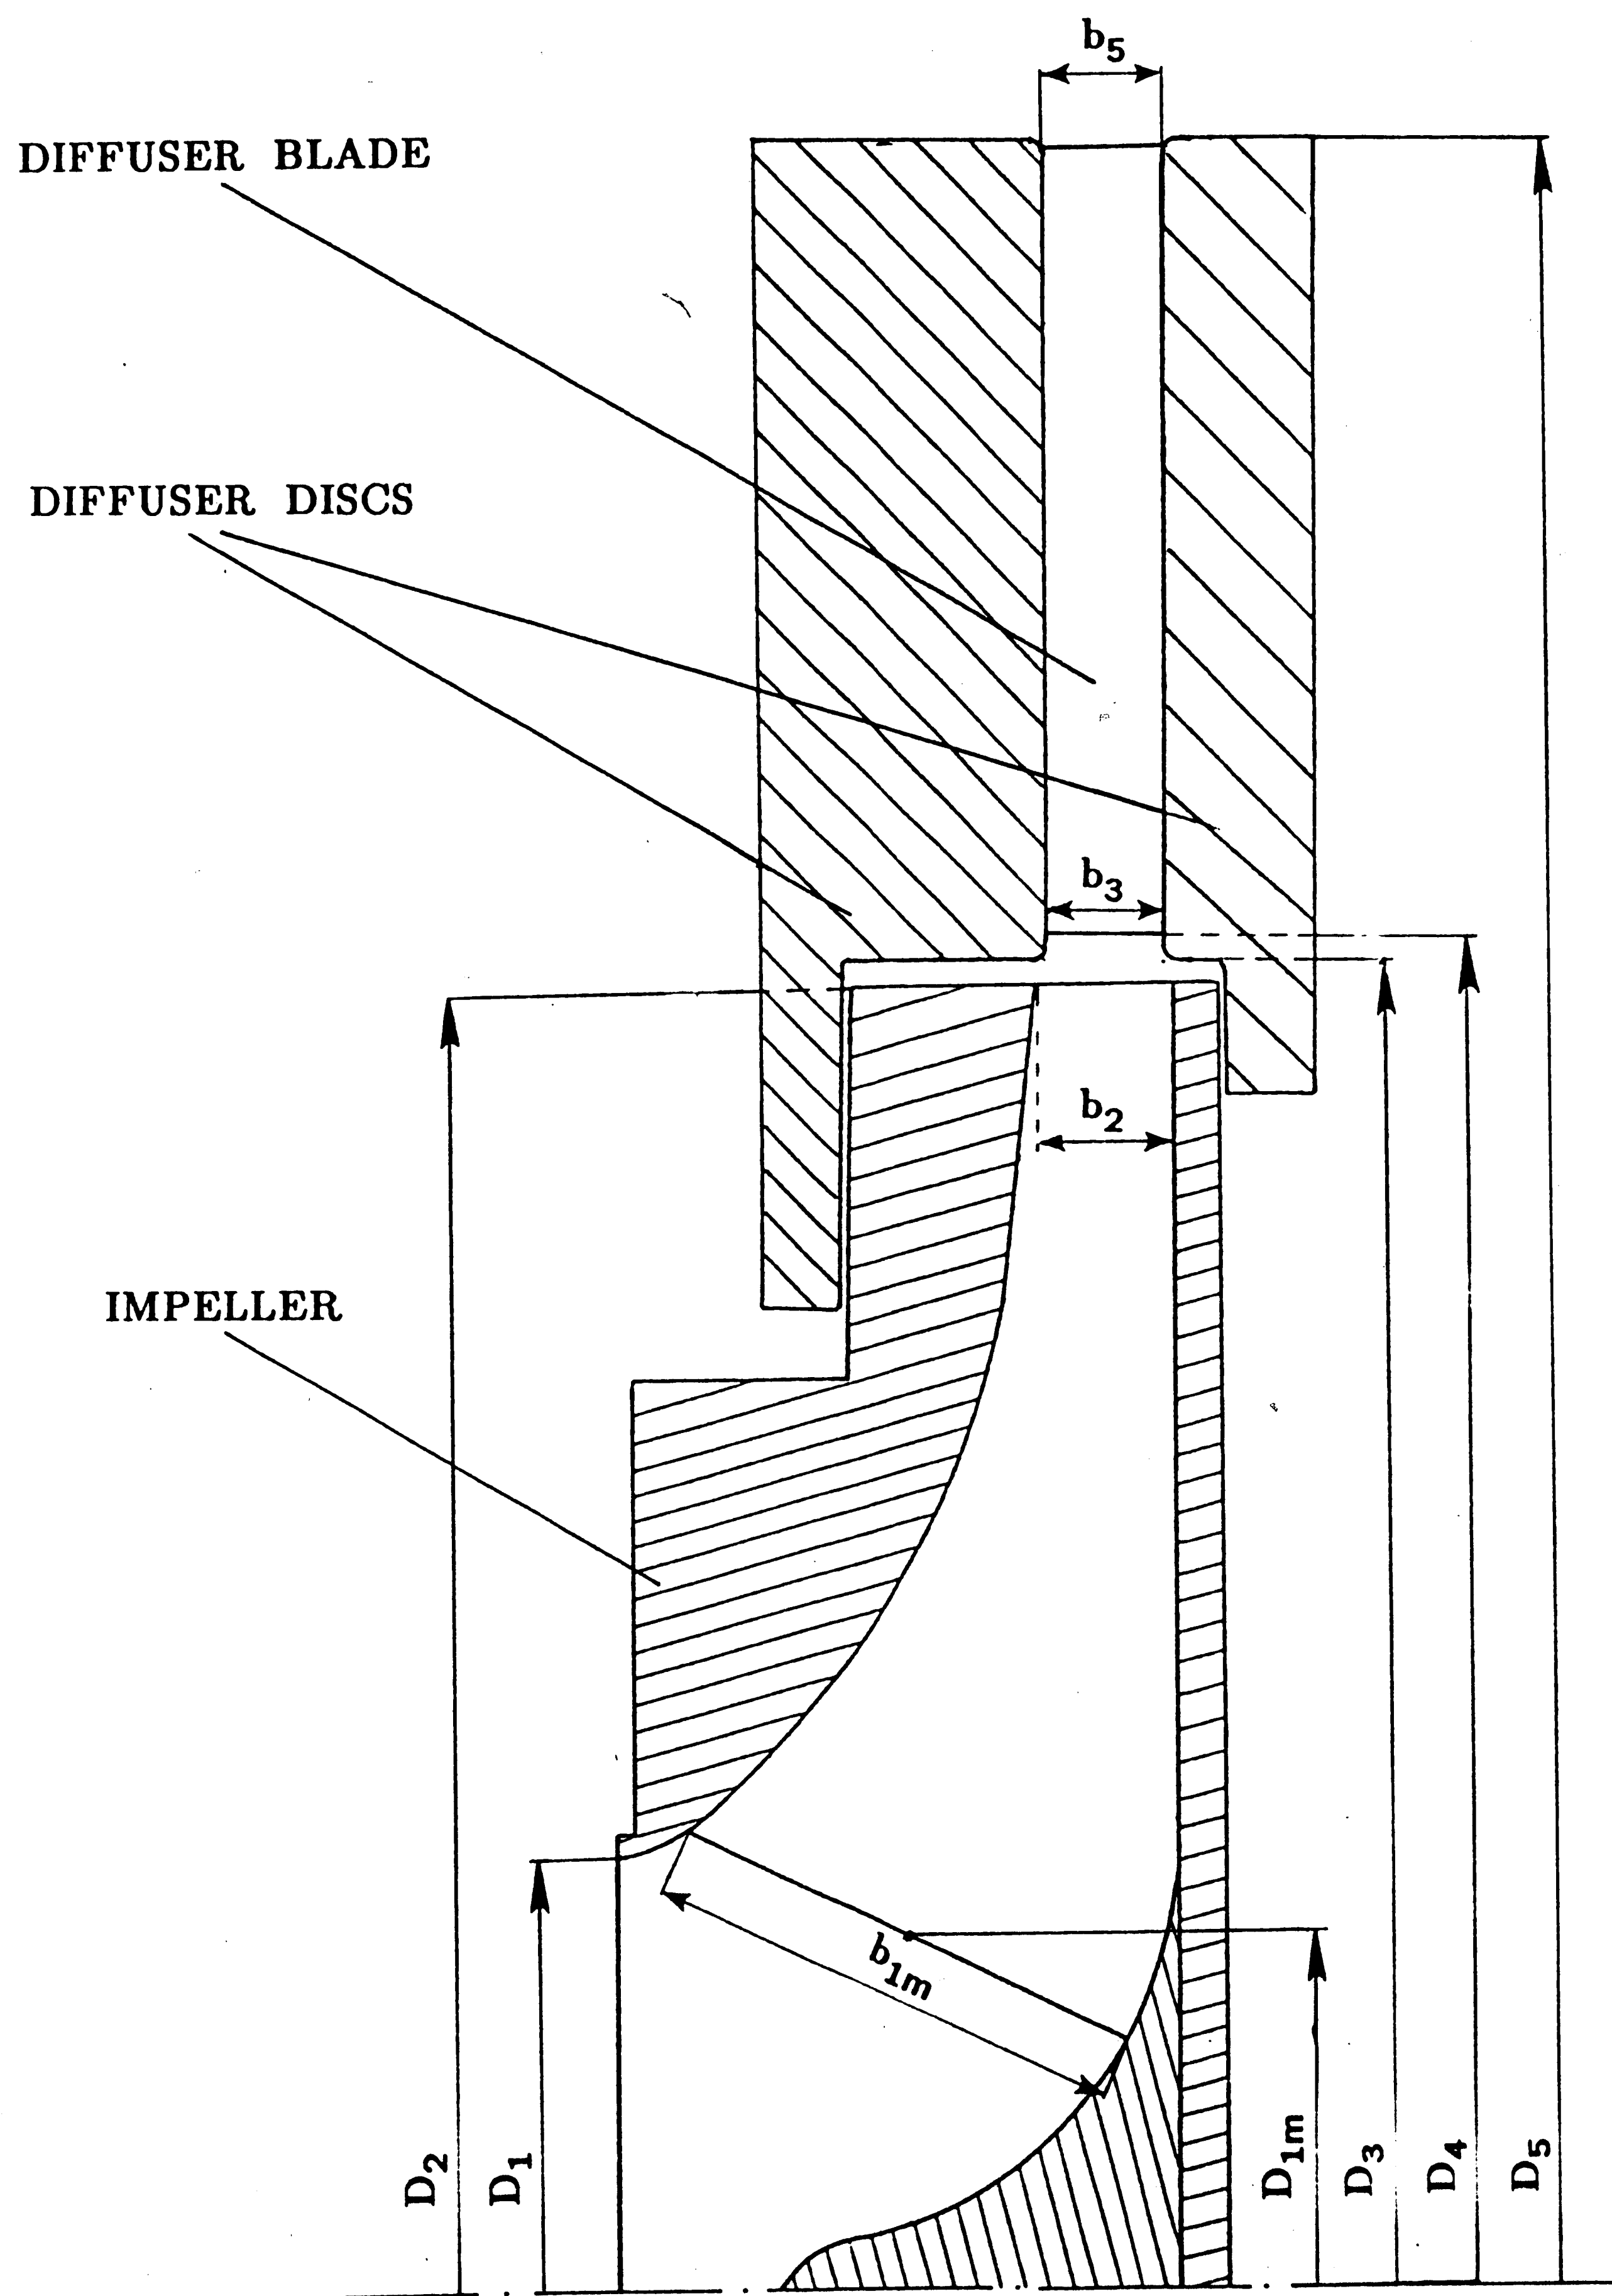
Six blade impeller with diffuser discs and diffuser blade.
